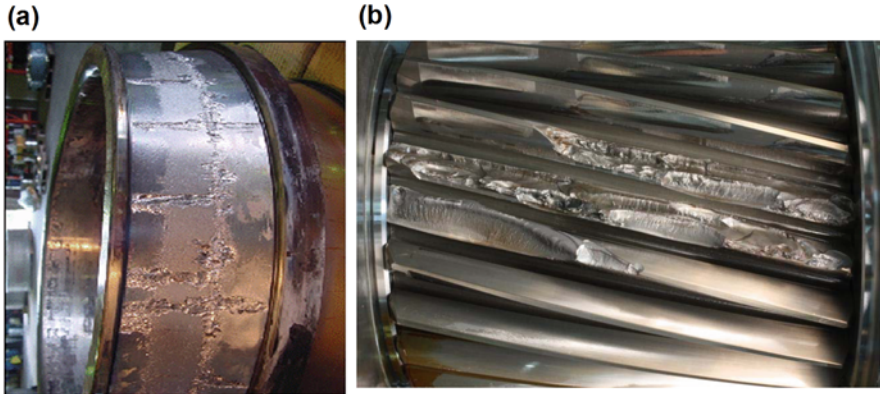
Typical wind turbine gearbox failure: (a) Bearing failure; (b) Gear failure (Shen et al. 2013; Sheng 2014)
